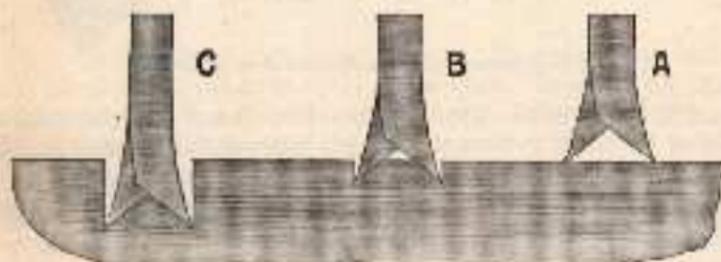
Scoring and cutting of cross-cut teeth (end view).
